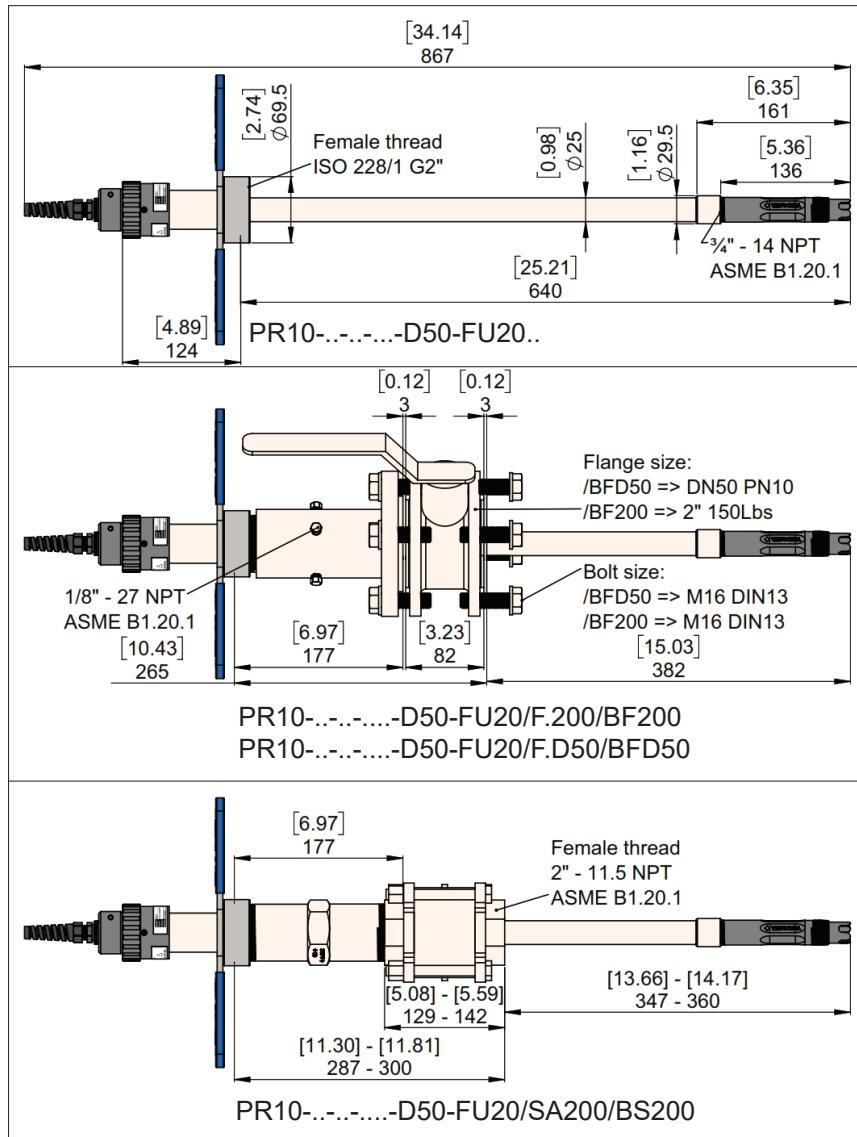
Dimensional drawing PR10...-D50 with mounted SC4A sensor
